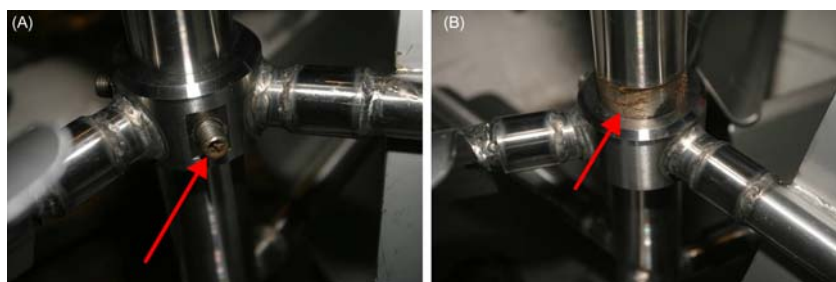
(A) The hub is secured to the shaft by means of bolts with dome head nuts. However, product may collect in and around the screw head (*red arrow*). (B) This nonwelded hub-to-shaft joint also lacks a food grade gasket that could seal the dead spaces in the groove and avoid crevices at points of metal-to-metal contact. Ingress and accumulation of product and/or microorganisms at the inside (*red arrow*) are shown. Welds also have a high degree of roughness. *Courtesy of Burggraaf & Partners B.V.
